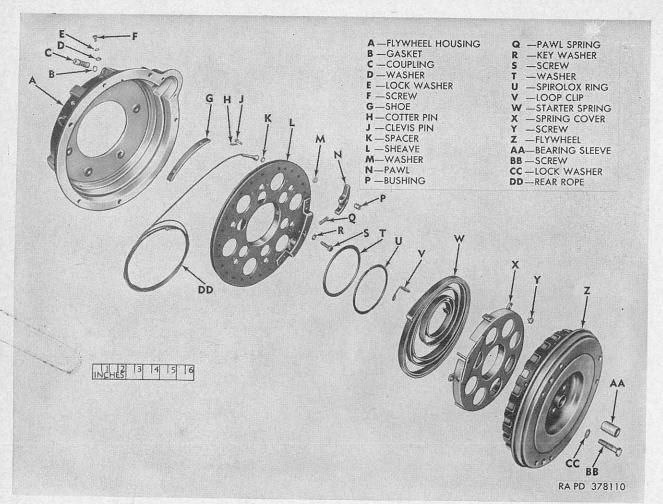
Exploded view showing relative positions of flywheel, flywheel housing and starter components.
